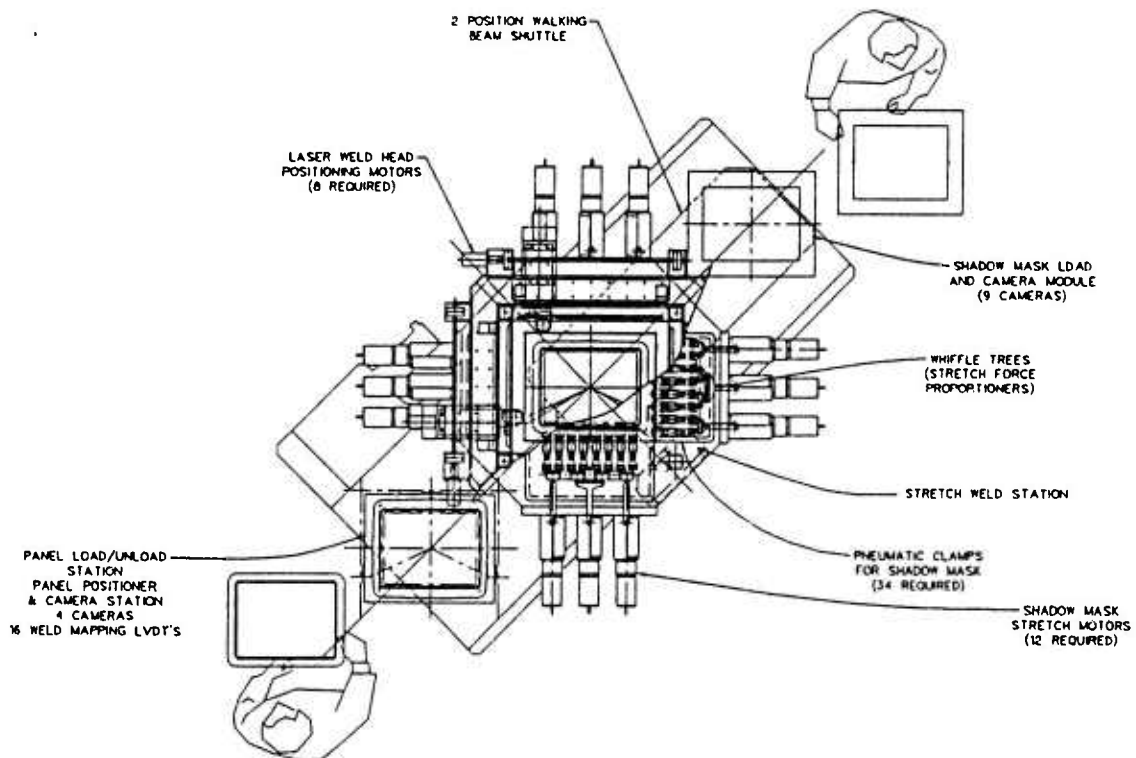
Top view of the large format stretch and weld machine
